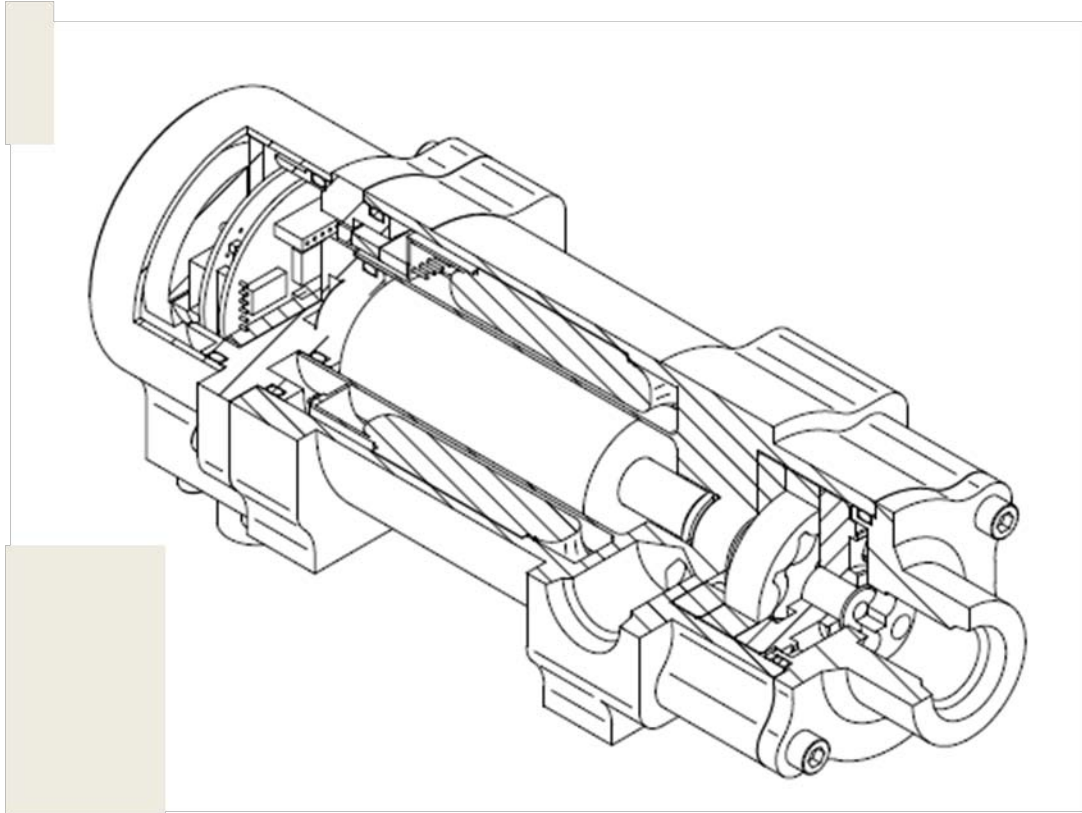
The new prototype pump incorporates corrosion resistant materials and integrated pump drive electronics.
